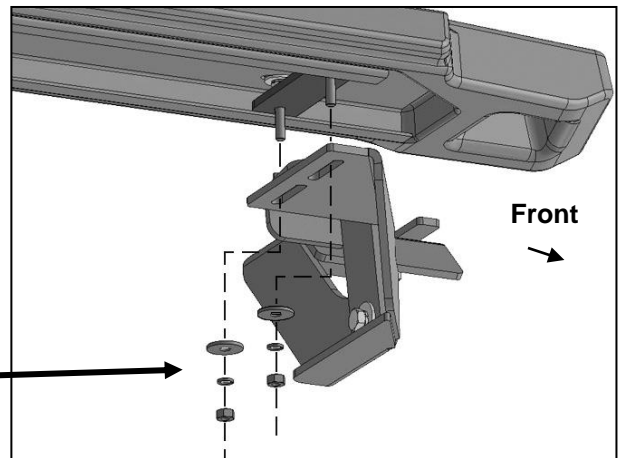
Attach passenger/right rear Mounting Bracket to Bolt Plate and back of Support Bracket
